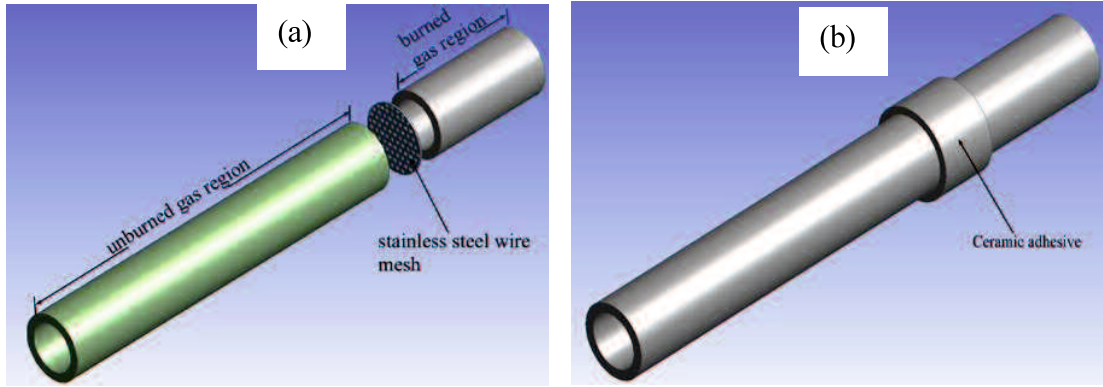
Sketch diagram of the combustor (a) exploded view (b) assembly view
